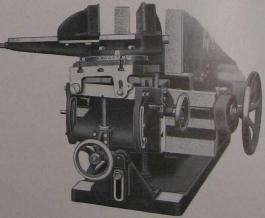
MOLD MAKER'S VISE AND TABLE
